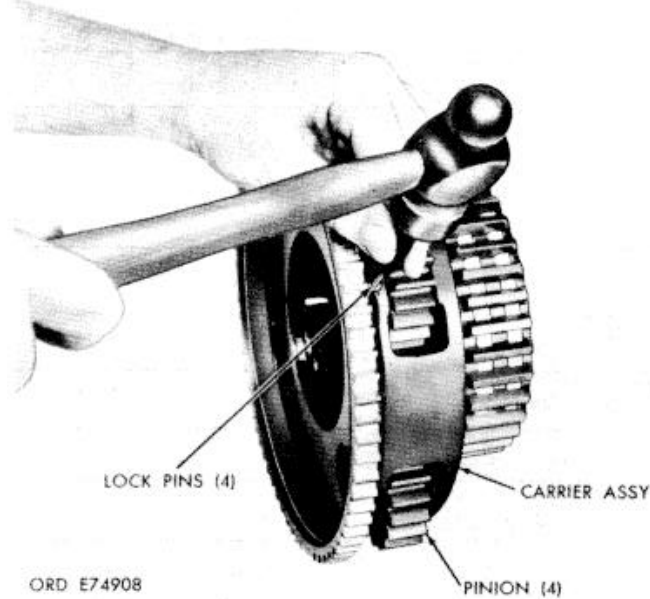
Removing spindle lock pins from intermediate range planetary carrier assembly.
